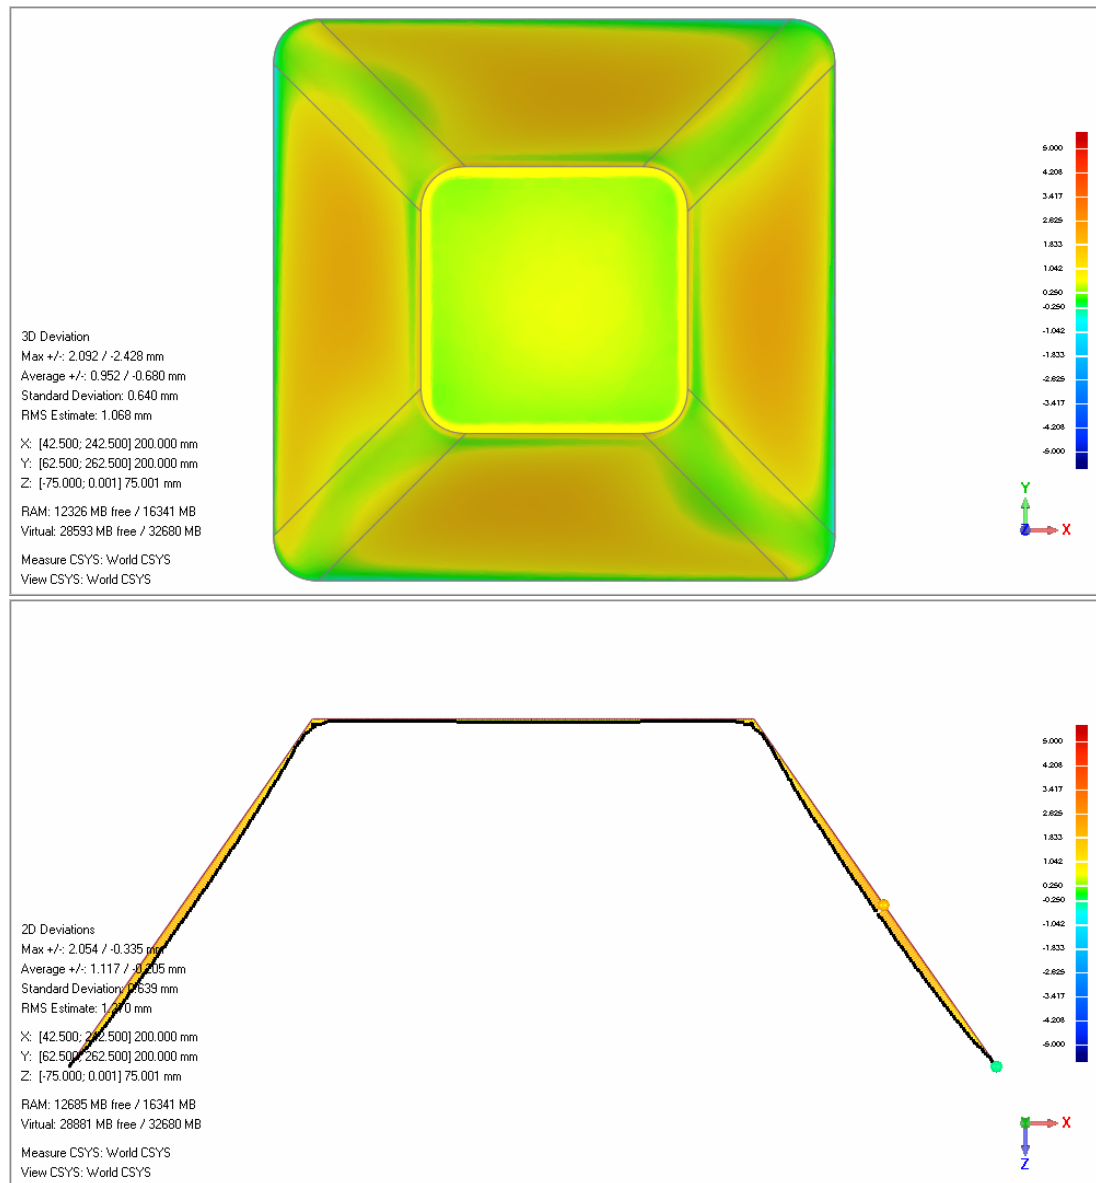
Part T9B geometric accuracy results - top view and cross-section view
